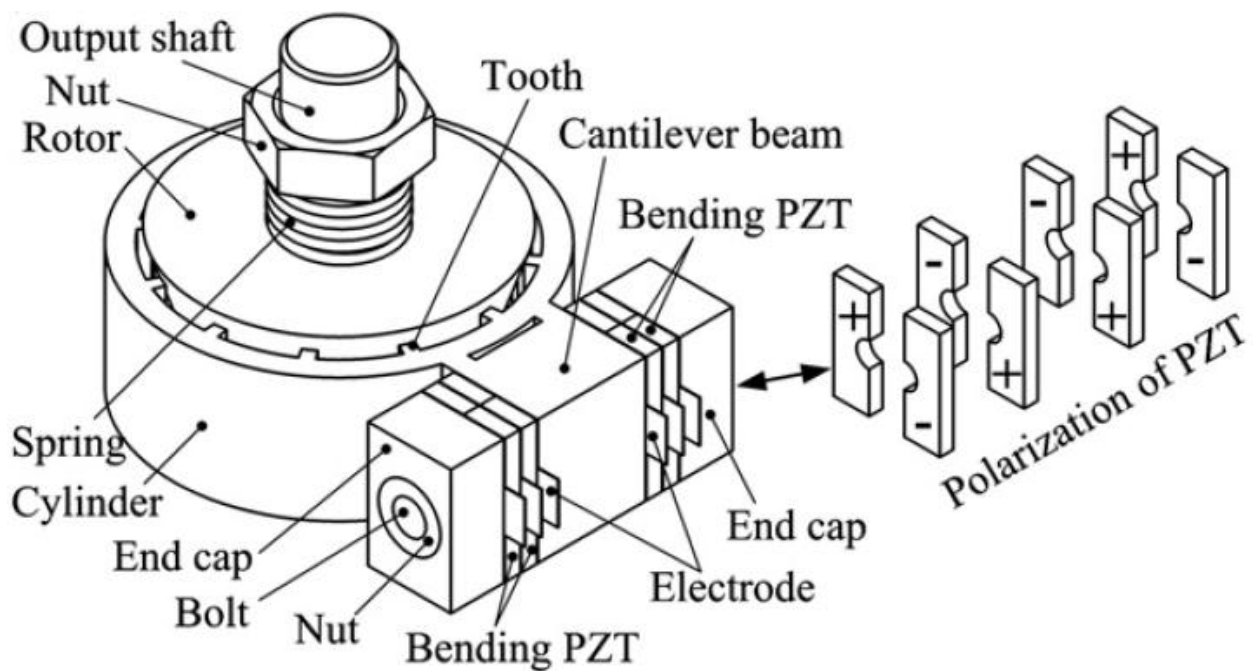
Stacked cylindrical motor design by Liu [25].
